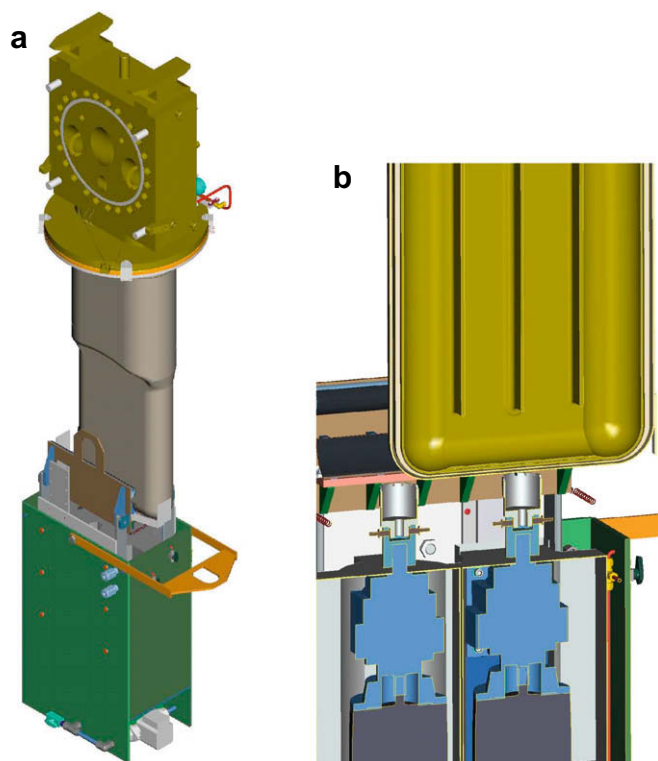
(a) Target module in cutting position and (b) cross-sectional view of target during cutting.
